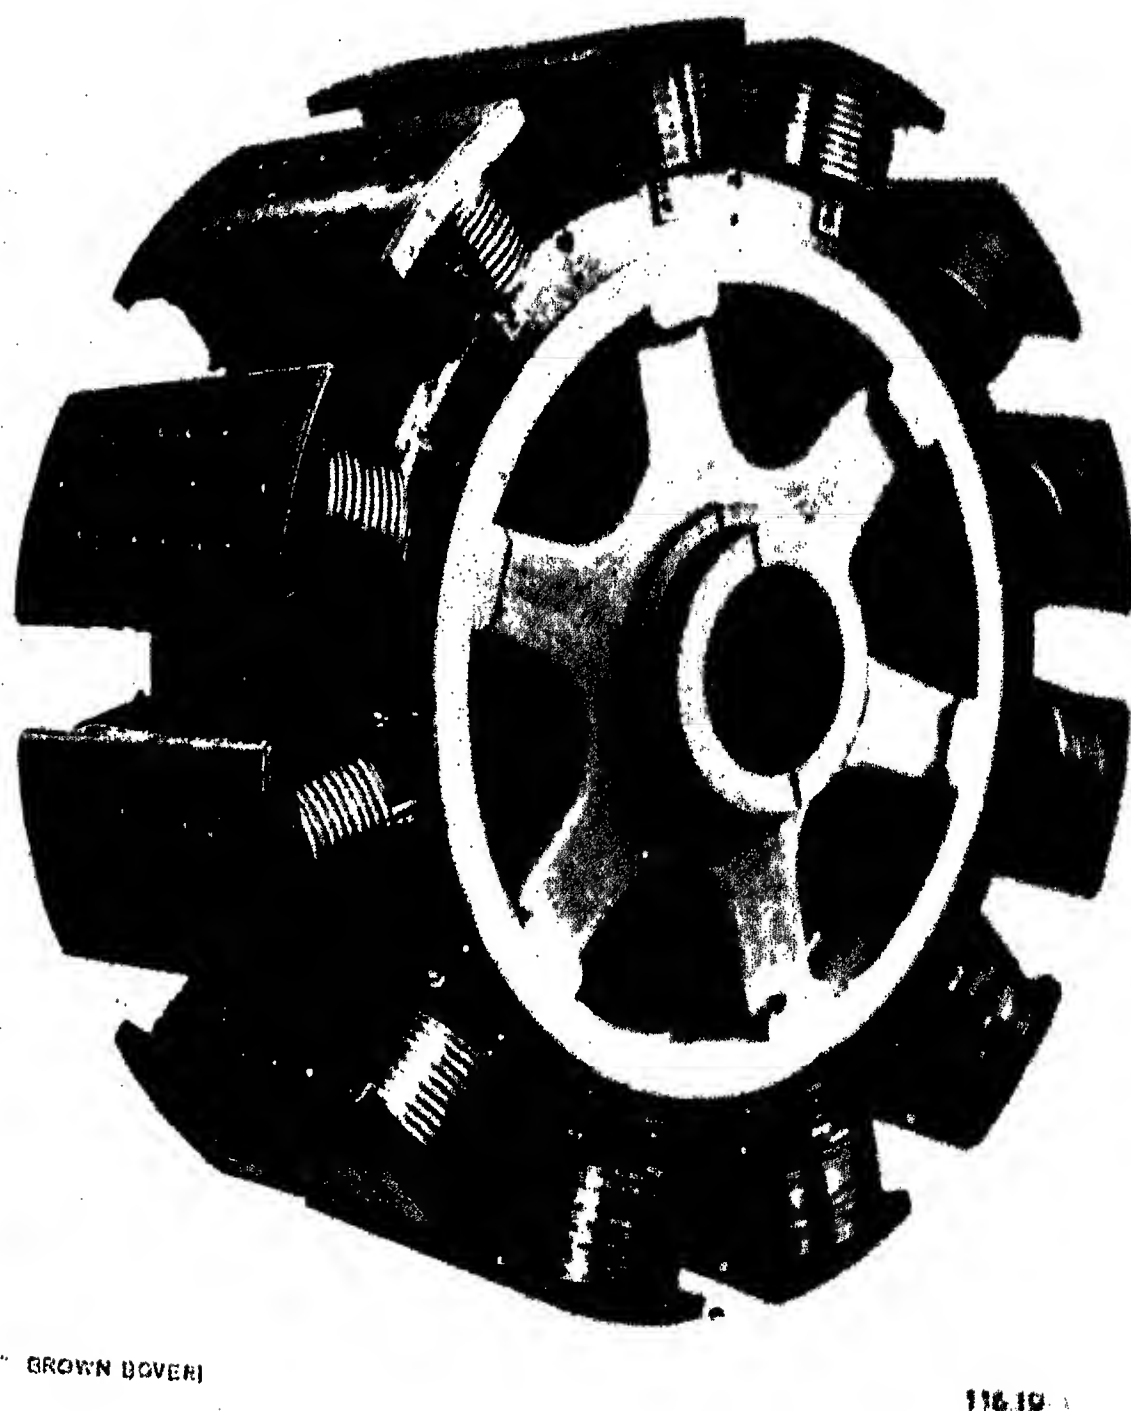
Pole wheel of a three-phase alternator, 7000 kVA, 500 r. p. m.
